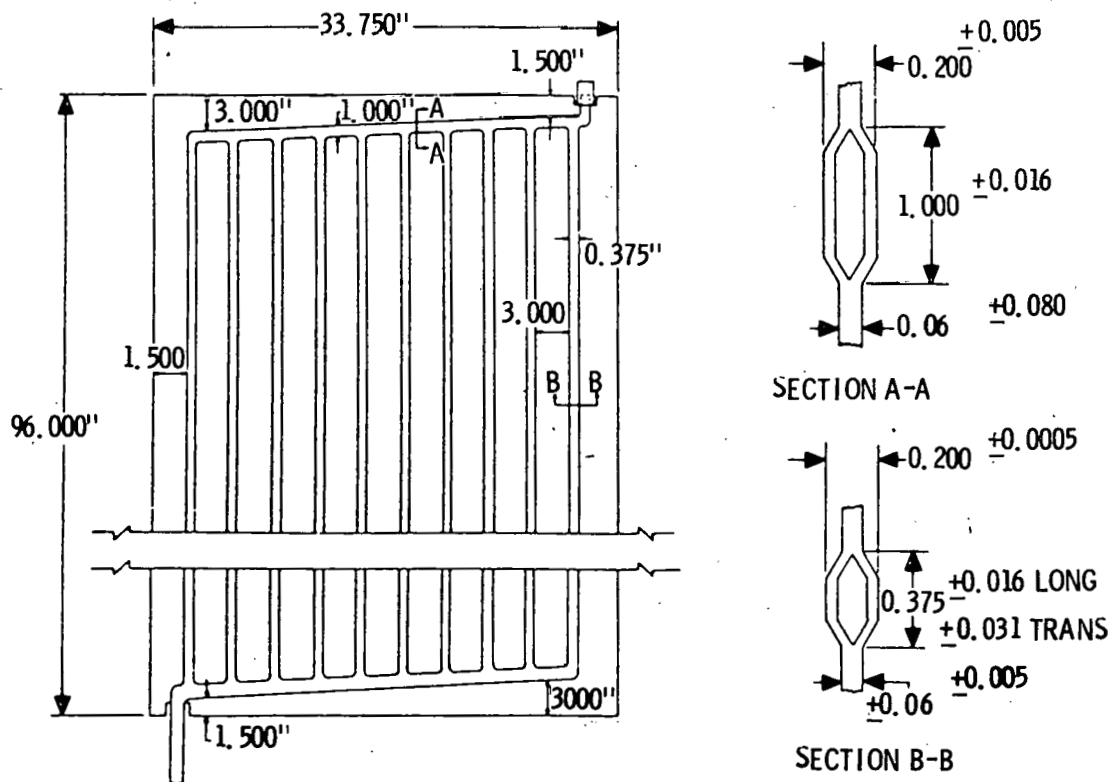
Tube Spacing and Dimensions in a Prototypical Liquid-Heating Collector
